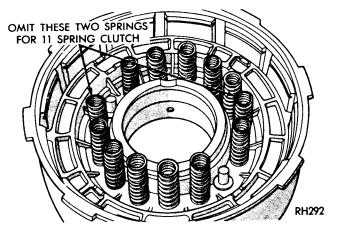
Front Clutch Spring Location (11 and 13 Springs)
